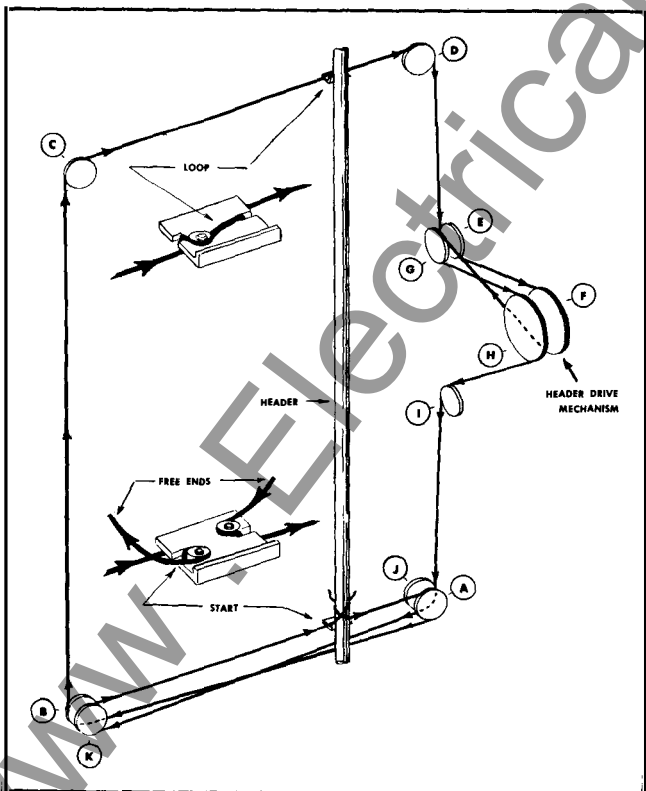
Cable Routing with Drive Mechanism on Right Side Wall
